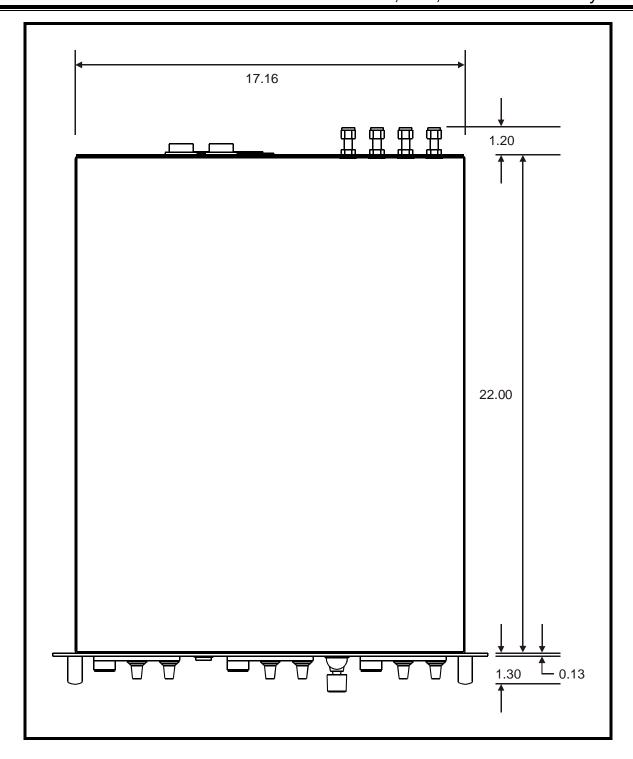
B-2 Analyzer Top View Outline & Mounting Dimensions
